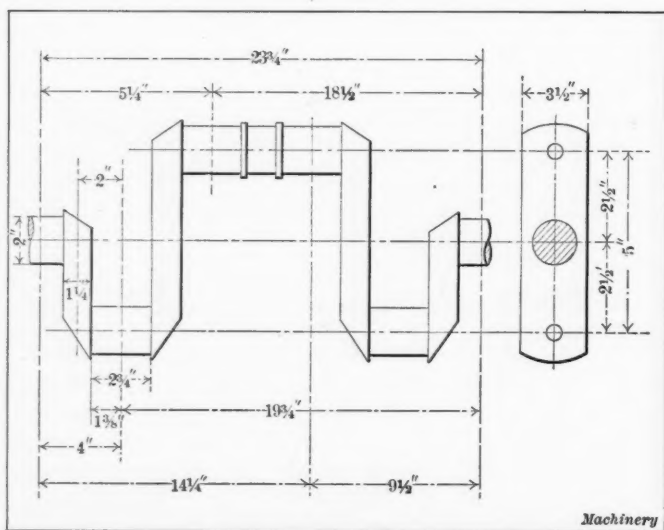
Four-cylinder, Two-bearing Crankshaft
